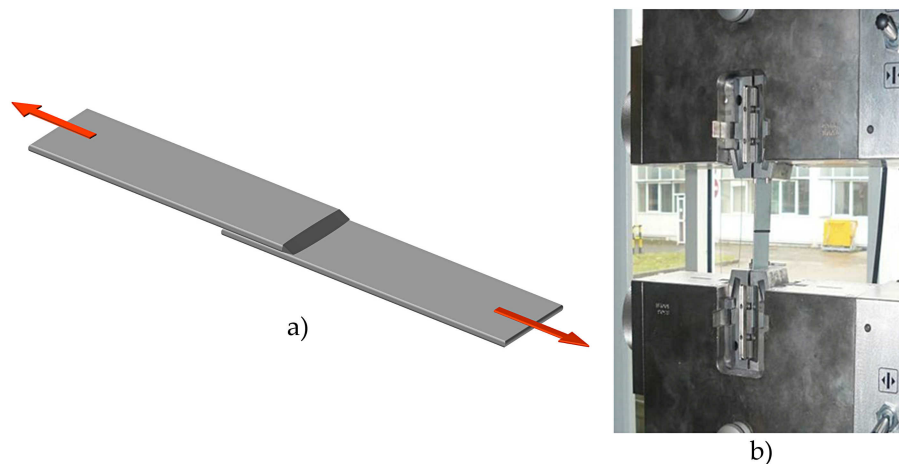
Illustration of arc welding mechanical test: a) schematic representation and b) picture of a sample in the tensile test machine.
